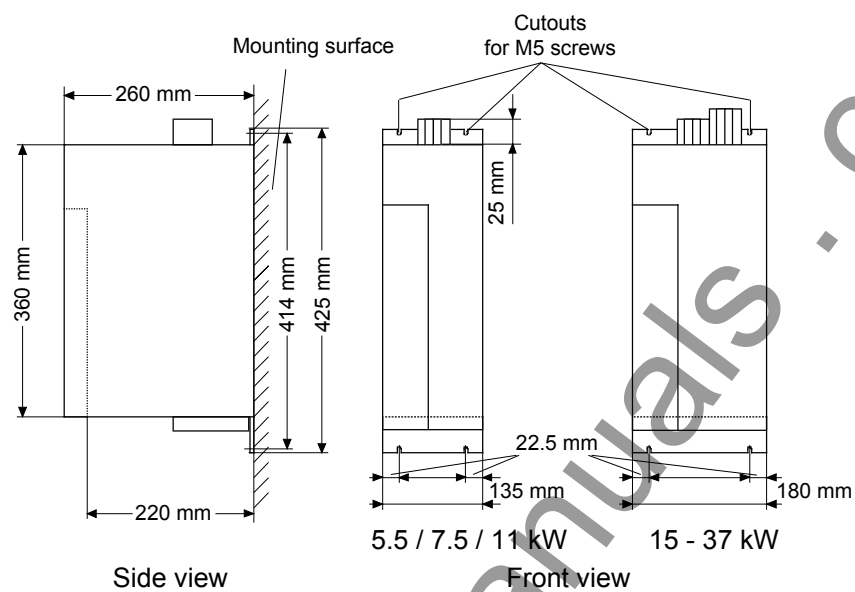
Dimension drawings for housings 135 mm and 180 mm wide
